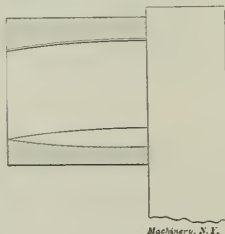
Section showing the Bending of a Crankpin and Consequent Unequal Wear of the Box.
